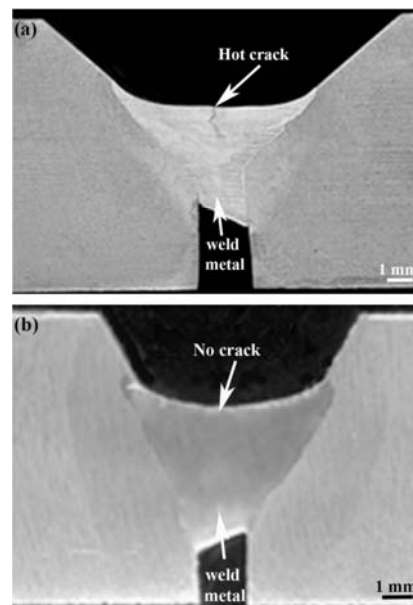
Cross-section after the Fisco hot crack test for welded samples (a) FCAW (b) Super-TIG
